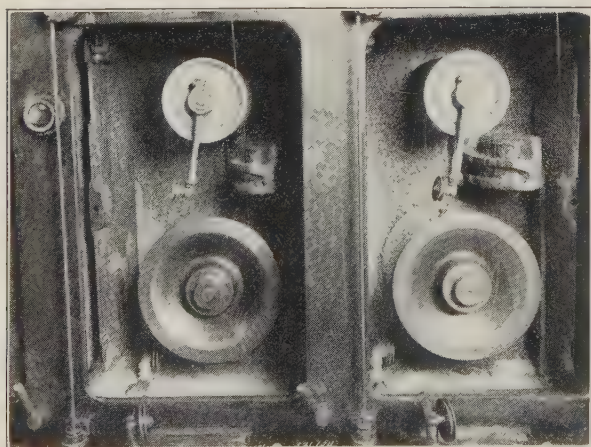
CLOSE-UP VIEW OF UNITS OF NO. 3 WIRE-DRAWING MACHINE
